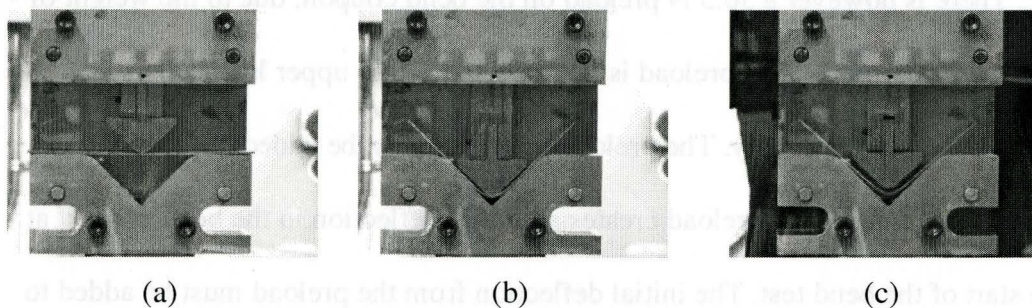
V-die bend testing sequence showing (a) start and (b) end of bending, and unloading of the punch resulting in springback (c).
